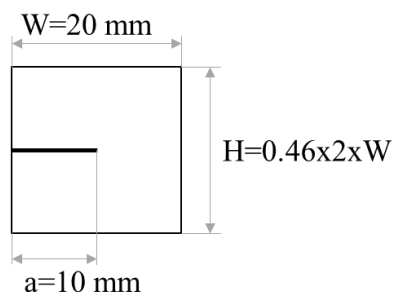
In-plane dimensions of the samples used for fracture tests. The value of H refers to the gauge length, with the samples being longer to allow for firm gripping.
